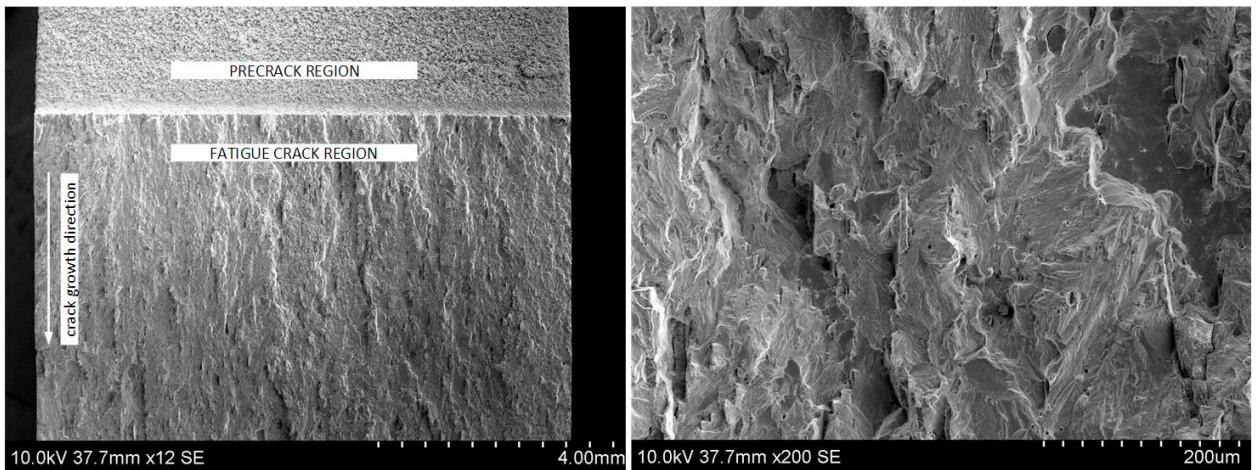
The initial fatigue fracture surface of the tested specimen $R=0.05$; macro-view (on the left), enlarged fracture area (on the right)
